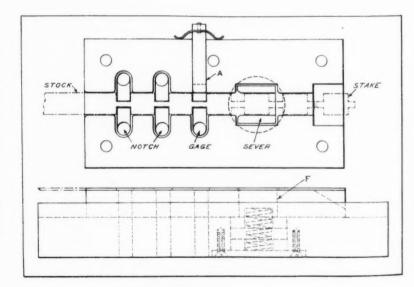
Plan and Elevation Views of Die Member Used with Punch Shown in Fig. 1
